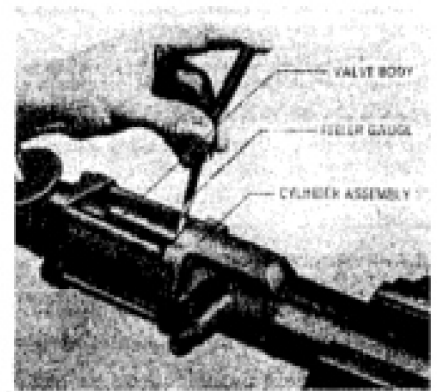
Method for determining thickness of shims (17—Fig. 37) required for reassembly of cylinder. Refer to test for procedure.
